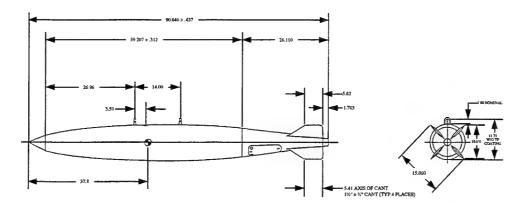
Layout of Mk 82 General Purpose Low Drag (GPLD) 500 lb bomb (all dimensions in inches)
